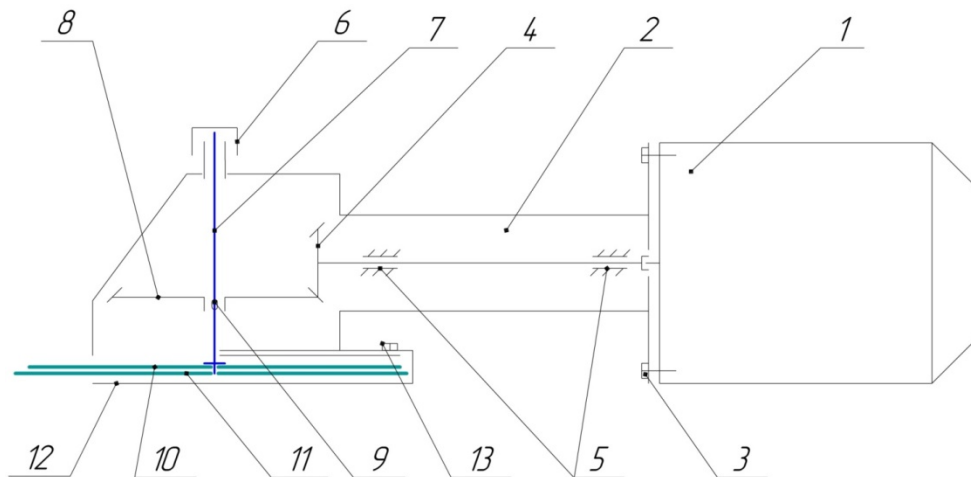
Schematic diagram of the rotary-type machine stryhalnoyi 1 - motor, 2 - body 3 - screws 4 - tapered shaft gear 5 - bearings, 6 - clamping head 7 - axle 8 - conical wheel 9 - key, 10 - Coulter, 11 - comb, 12 - foot, 13 - screws.
